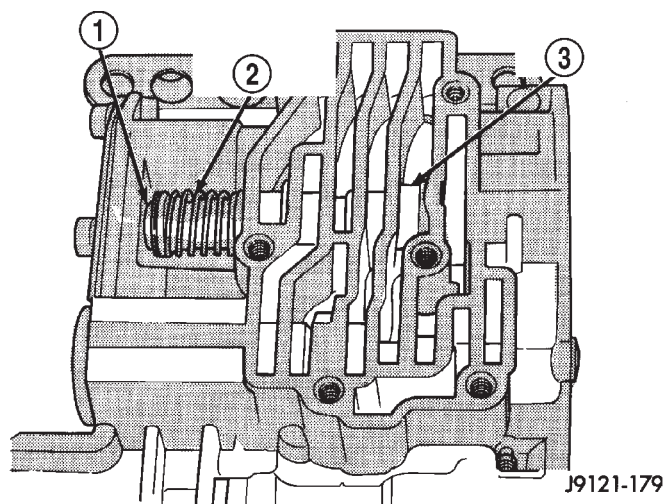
Shuttle Valve E-Clip And Secondary Spring
